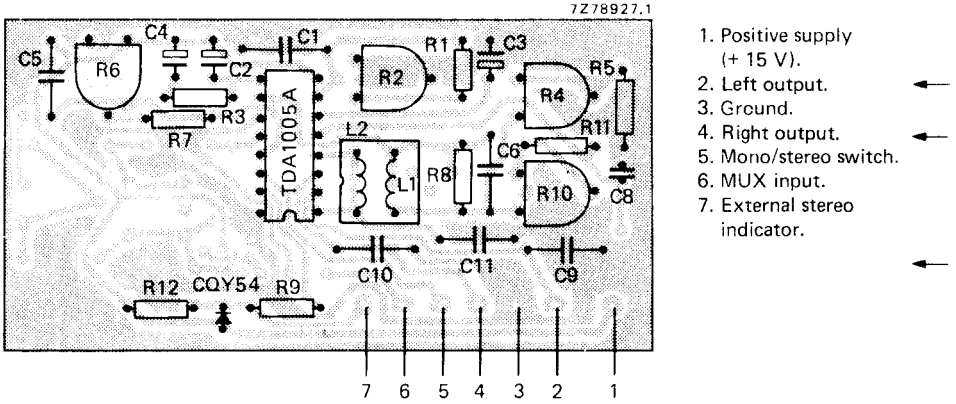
Printed-circuit board component side of an f.d.m. decoder, showing component layout. For circuit diagram see Fig. 7.
